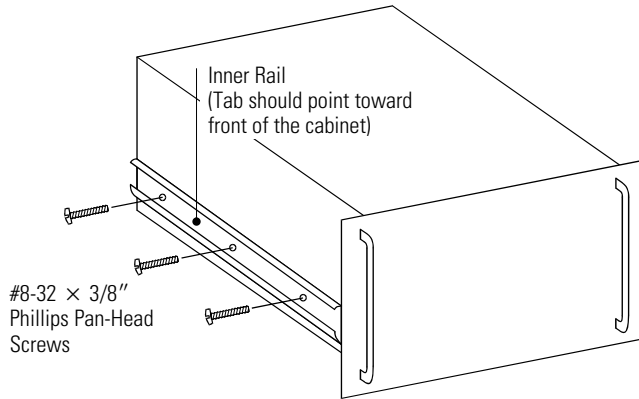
Attaching the Inner Rail to the Battery Cabinet
